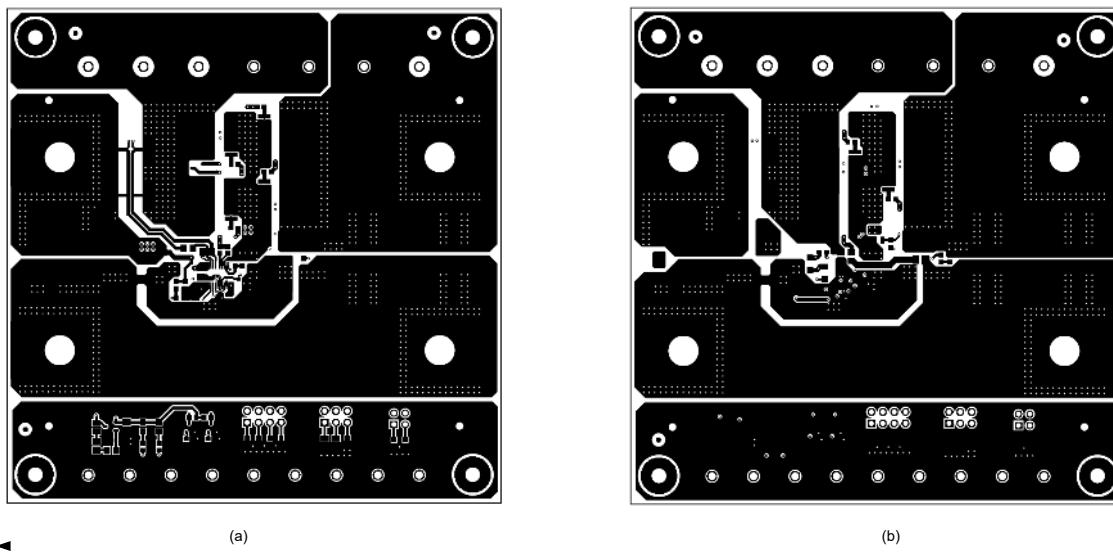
TPS48111Q1EVM Board (a) Top Layer (b) Bottom Layer
